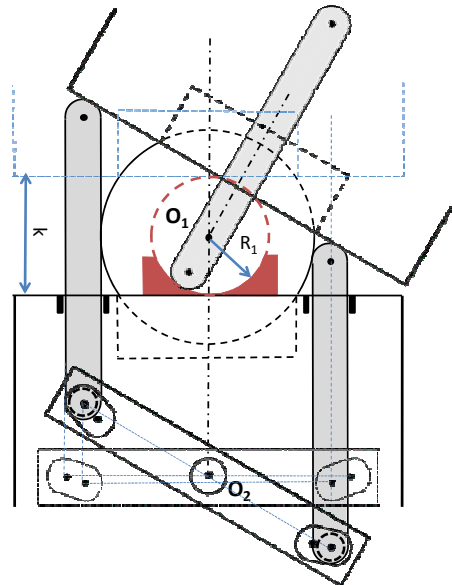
Side view of the bending joint showing the concave part for 2.D.O.F bending
